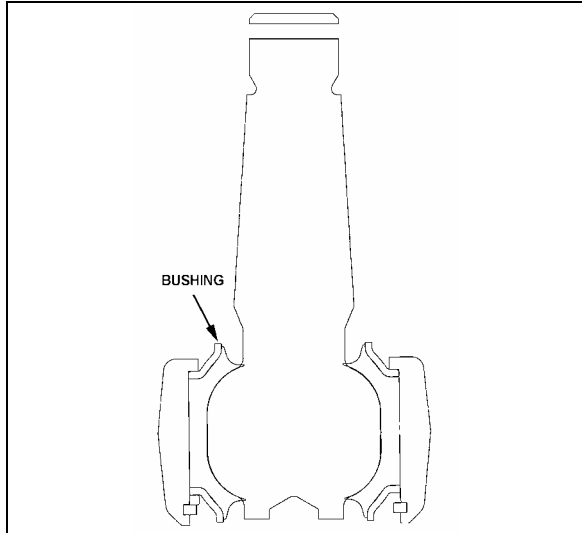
LOWER A-ARM CENTRAL BALL JOINT 16113
